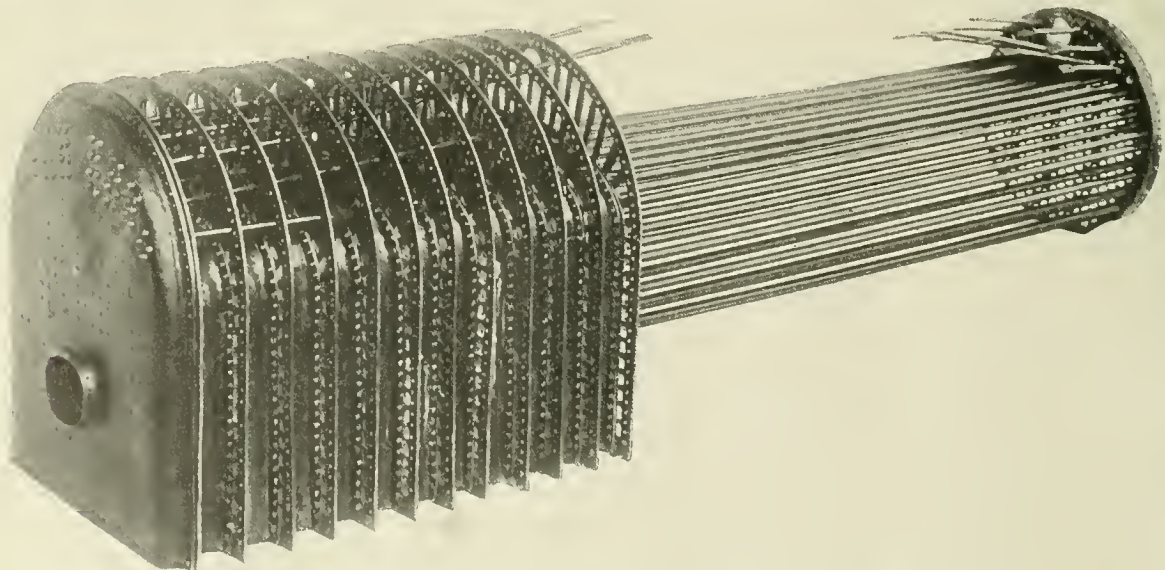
VIEW OF FIREBOX WITH BOILER SHEEL AND OUTSIDE SECTIONS REMOVED.
